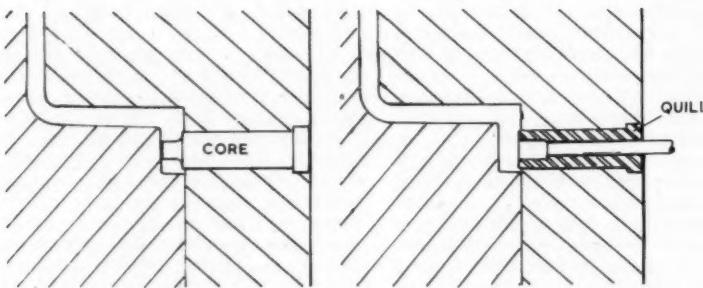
The cores and quills respectively forming holes and rivets may advantageously be made interchangeable
